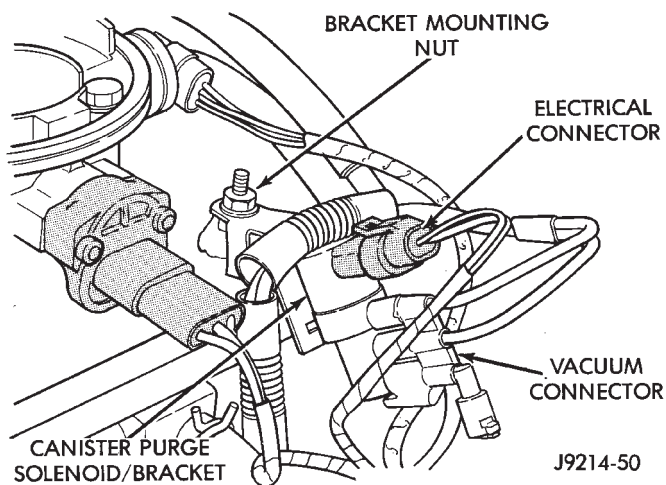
EVAP Canister Purge Solenoid—5.2L Engine
